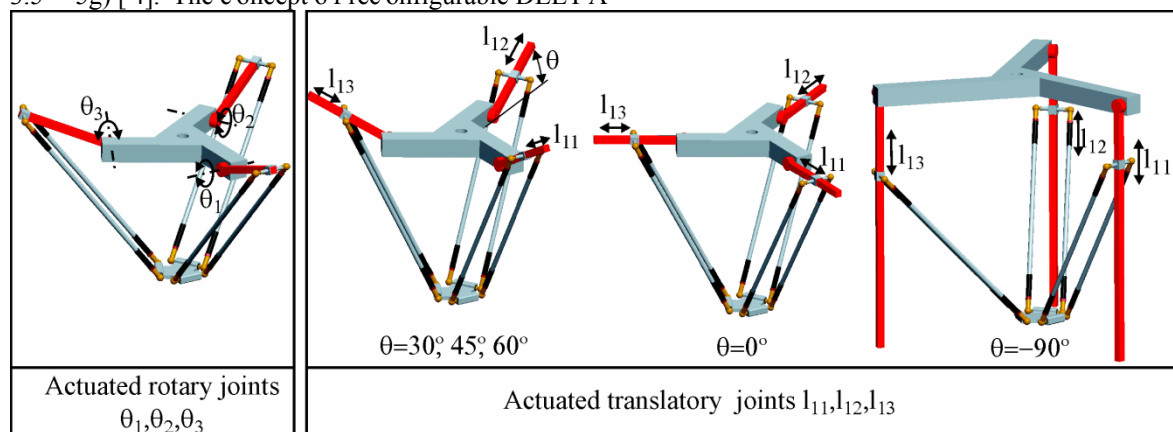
Concept of reconfigurable DELTA robots and small machine tools with rotary or translatory actuated joints
